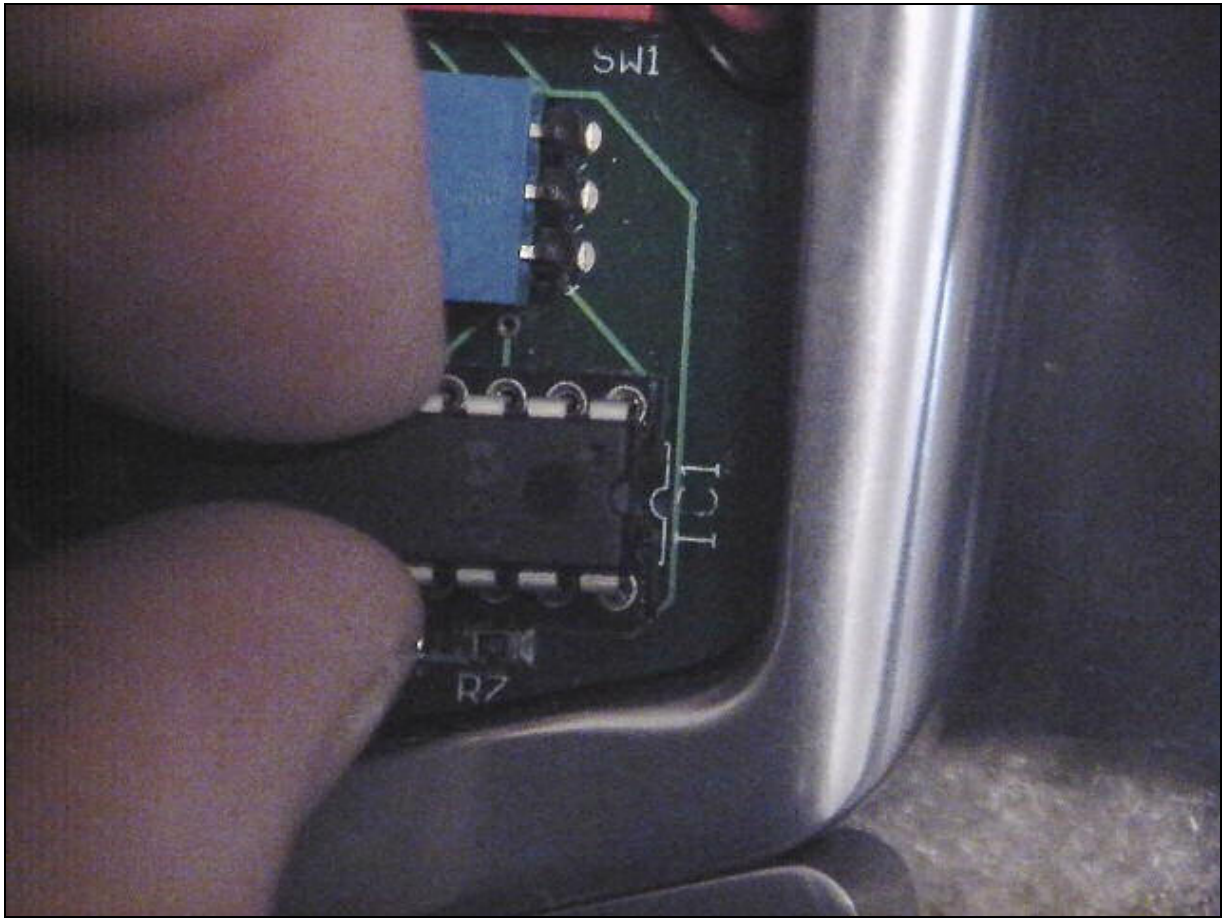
Insert Equalizer chip in socket with notch facing to the right
